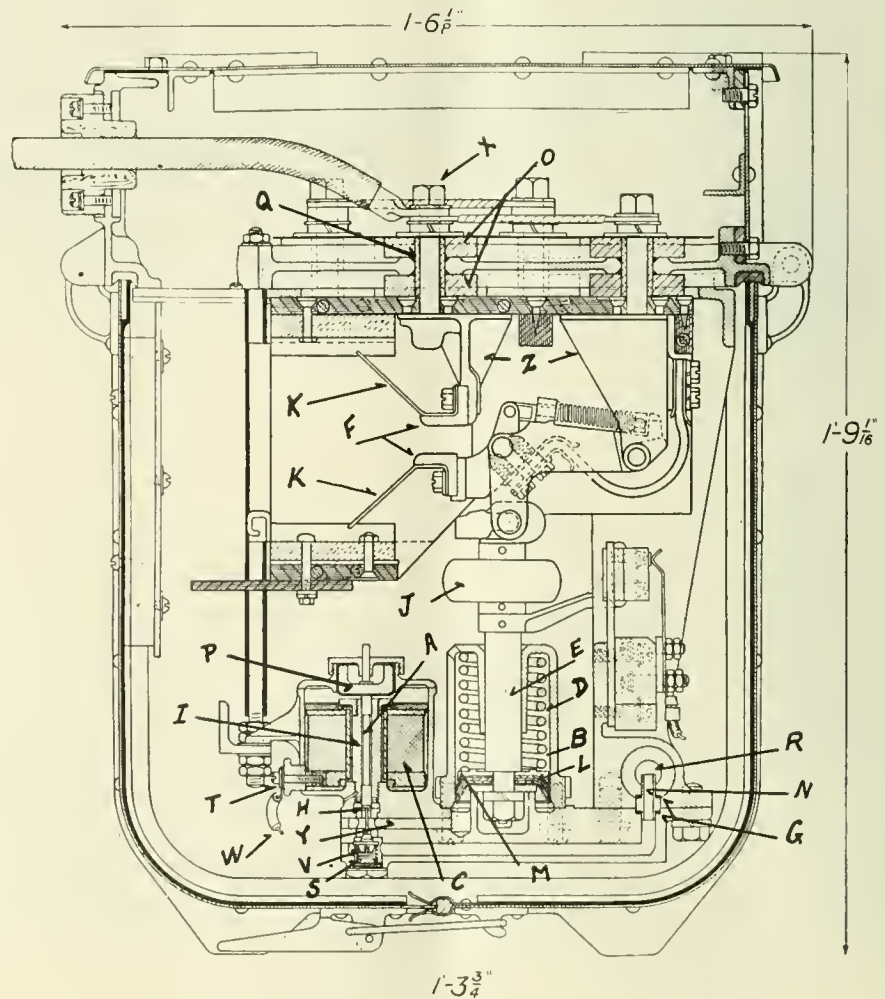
CROSS SECTION DRAWING OF THE SWITCH GROUP.
